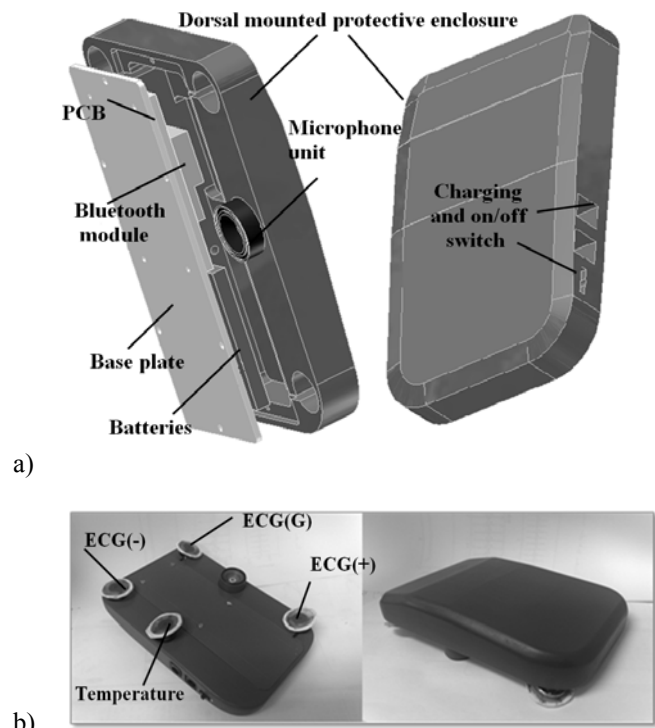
a) CAD model including batteries, PCB and Bluetooth module
